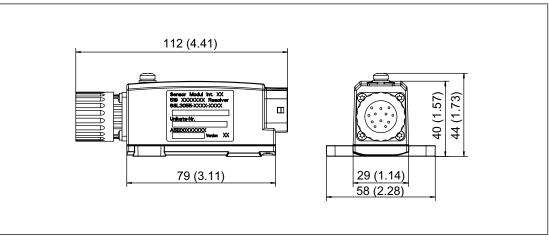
Dimension drawing SME20, Order number 6SL3055-0AA00-5EA0
